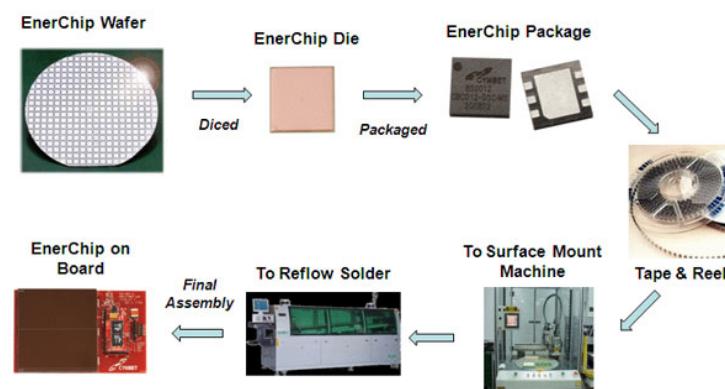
EnerChip Wafer Fab to Bare Die to Packaged Parts to SMT/Reflow to Board
